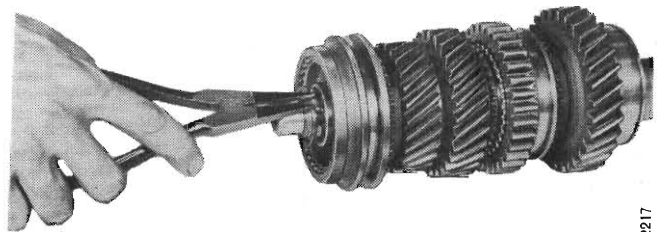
Removing snap ring—third and fourth speed synchronizer.
